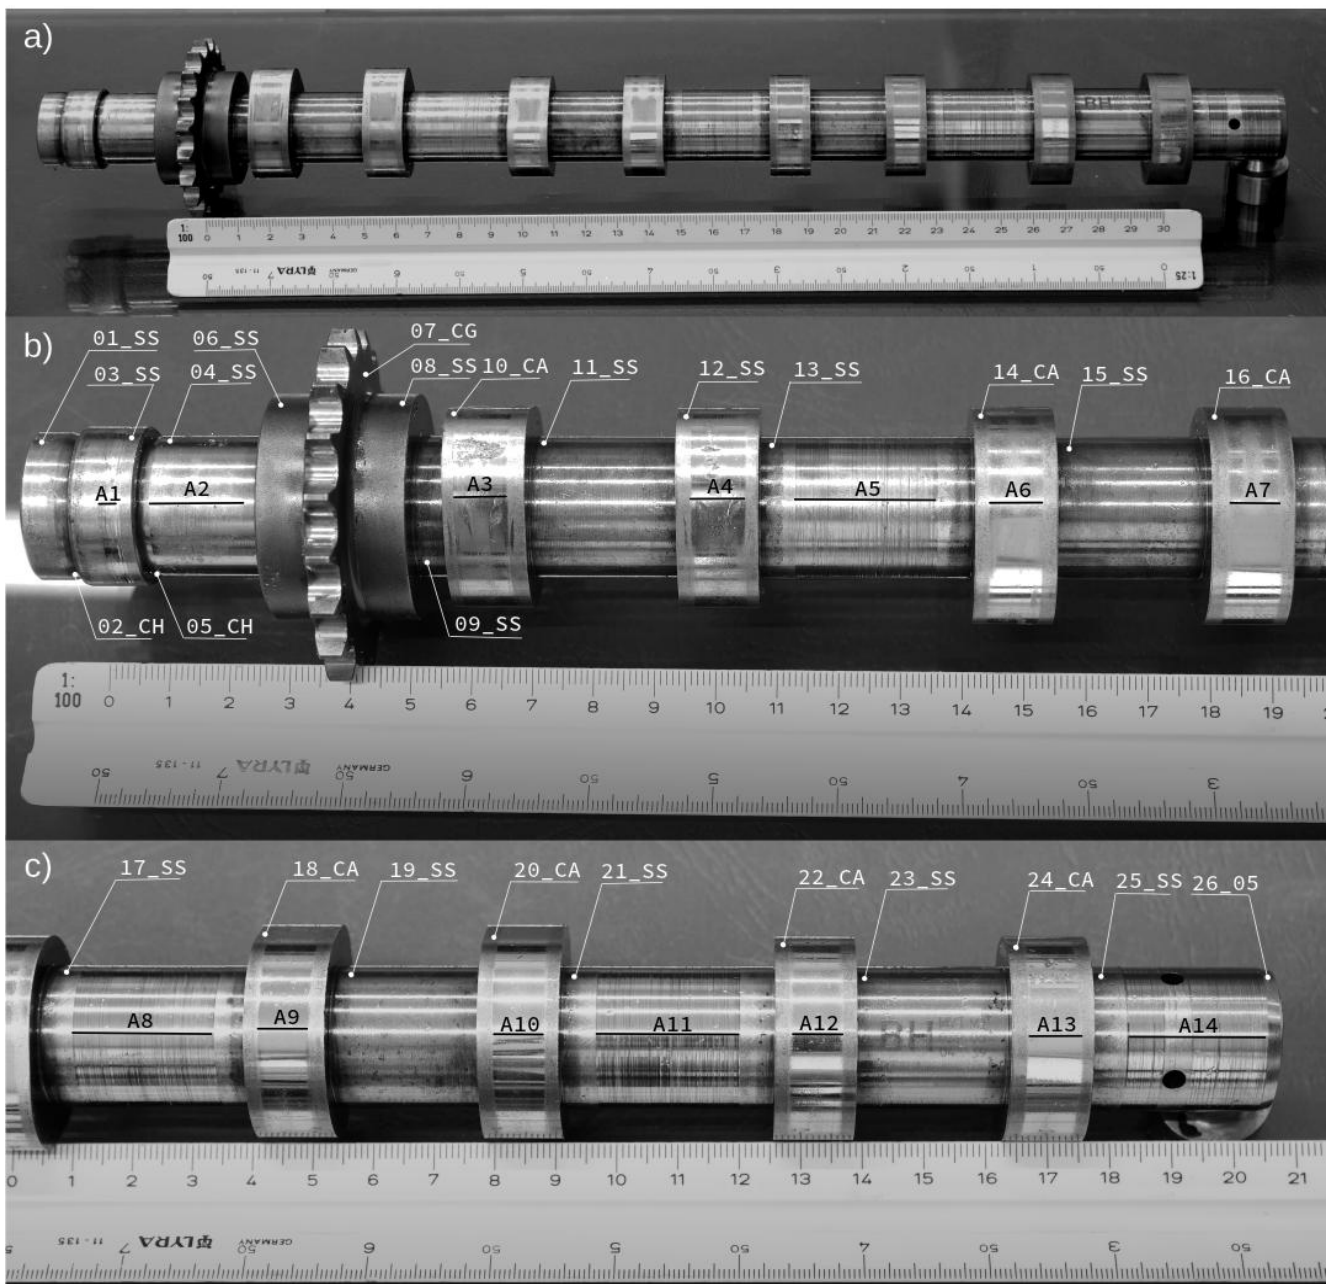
Cam shaft example with specified part of elements: a) whole cam shaft, b) left side close-up (chamfers on both sides of 03_SS are omitted), c) right side close-up
